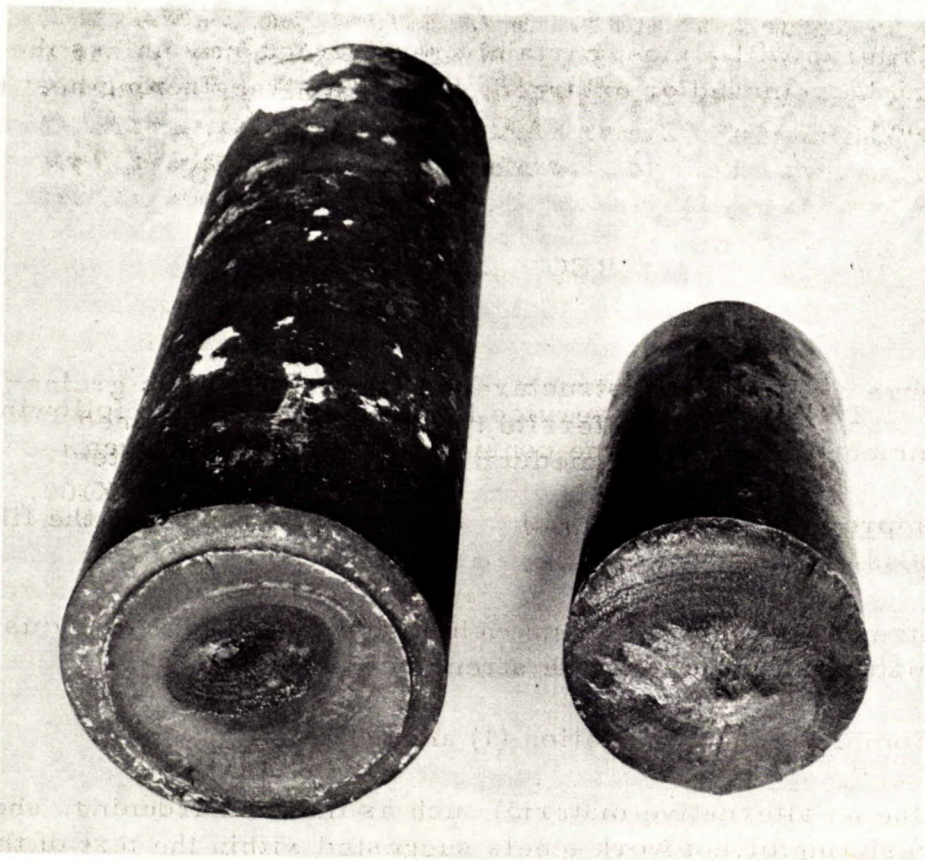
Fractured surface of a broken crust breaking tool. As Received, X2/3.
